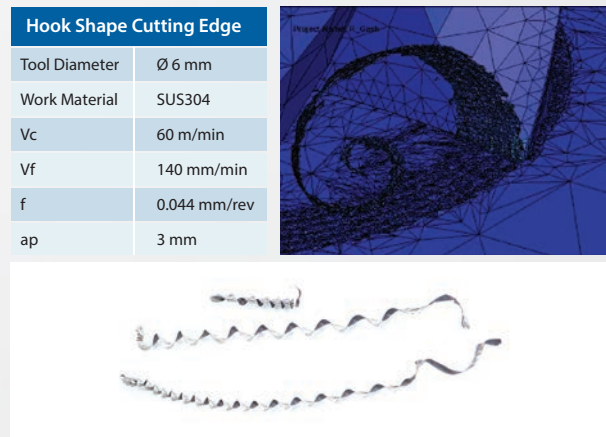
Cutting chips created by the AE-VTSS end mill with hook shape cutting edge from plunging in SUS304.
